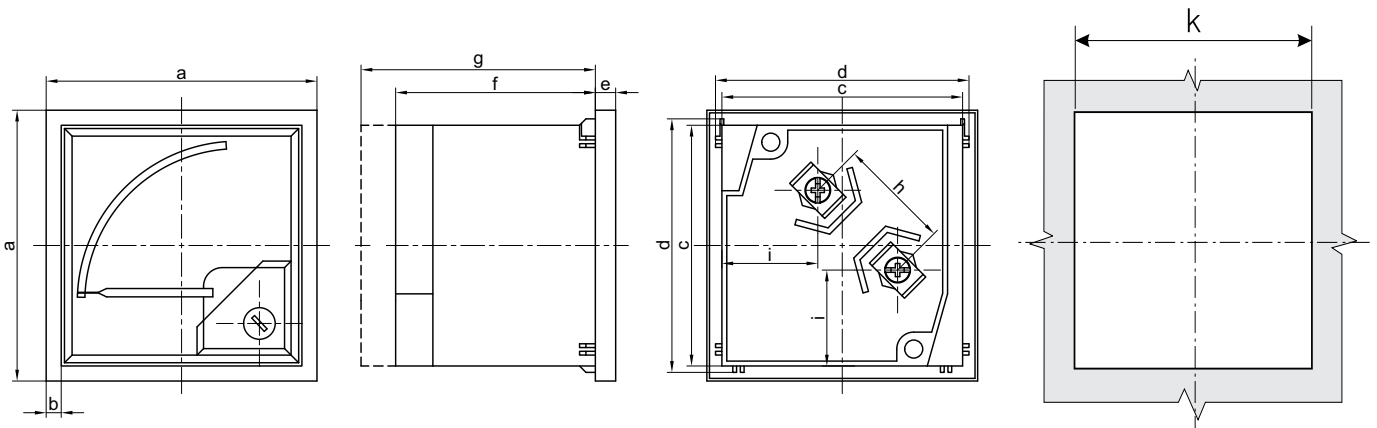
External dimensions of CA36, CA37, CA39, CA32 meters.
